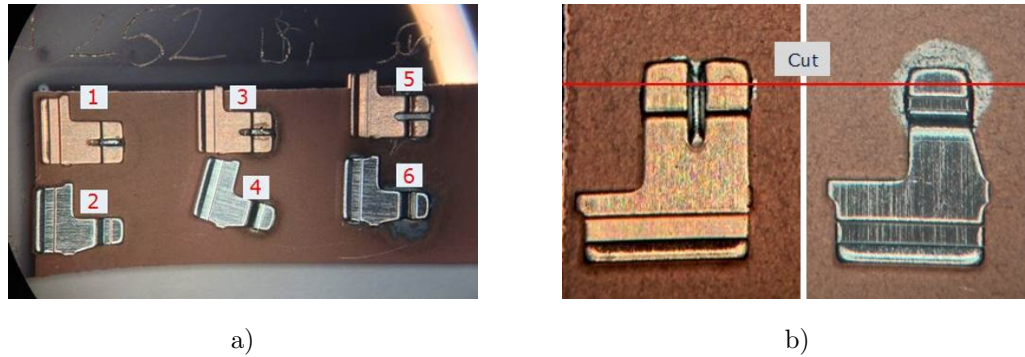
(a) Top view on soldered clips on CP-003: PbSnAg solder with (1) Cu and (2) CuAg clip, BiAg solder with (3) Cu and (4) CuAg clip and SnAg solder with (5) Cu and (6) CuAg clip. (b) Top view on two clips with an indicated cut for further analysis.
